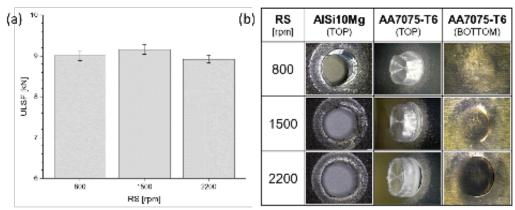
Lap shear testing results for RFSSW LPBF AlSi10Mg - rolled AA7075-T6 welds produced with different rotational speeds (RS). a) The ultimate lap shear force of produced joints; b) Fracture types observed for samples in a).
